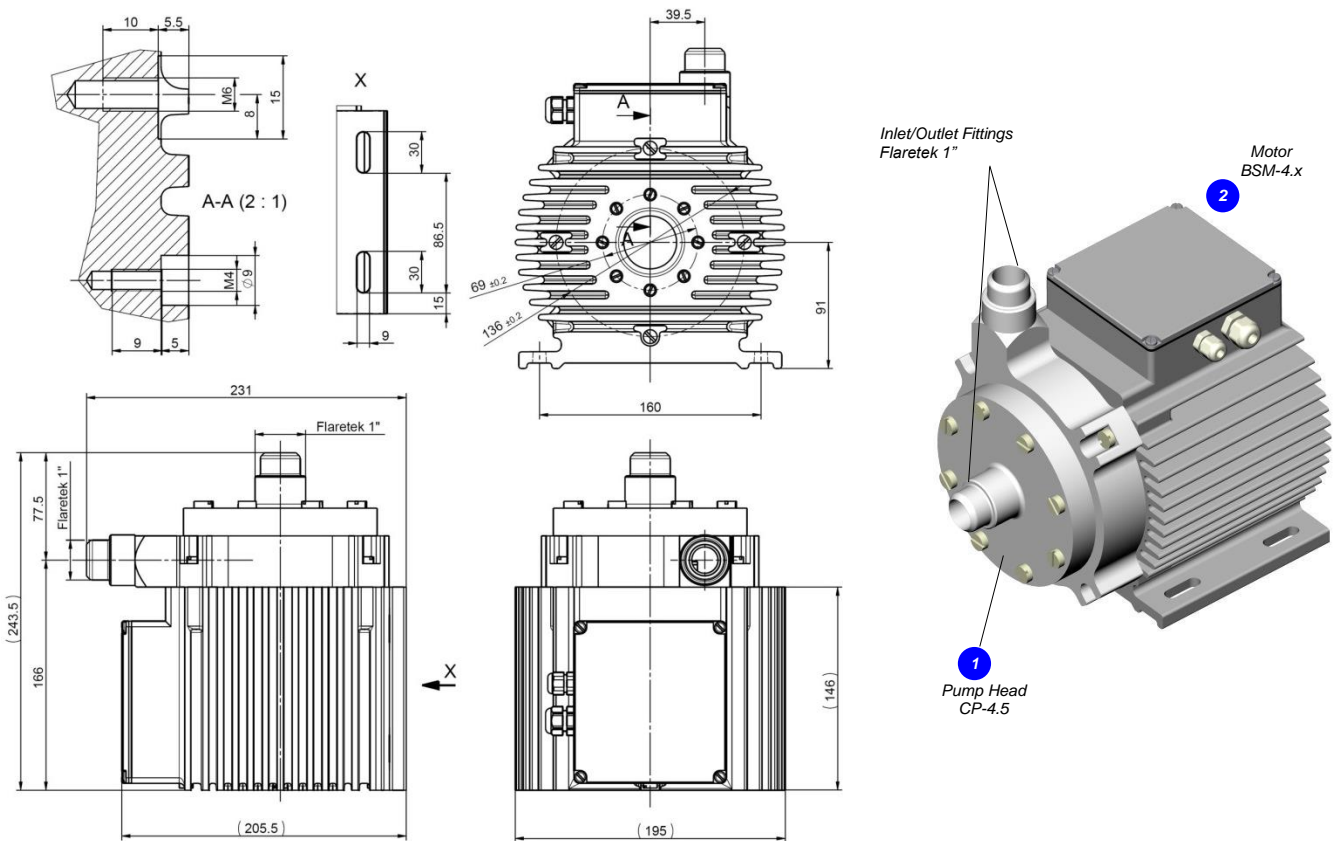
Dimensions of motor BSM-4.x with pump head CP-4.5
